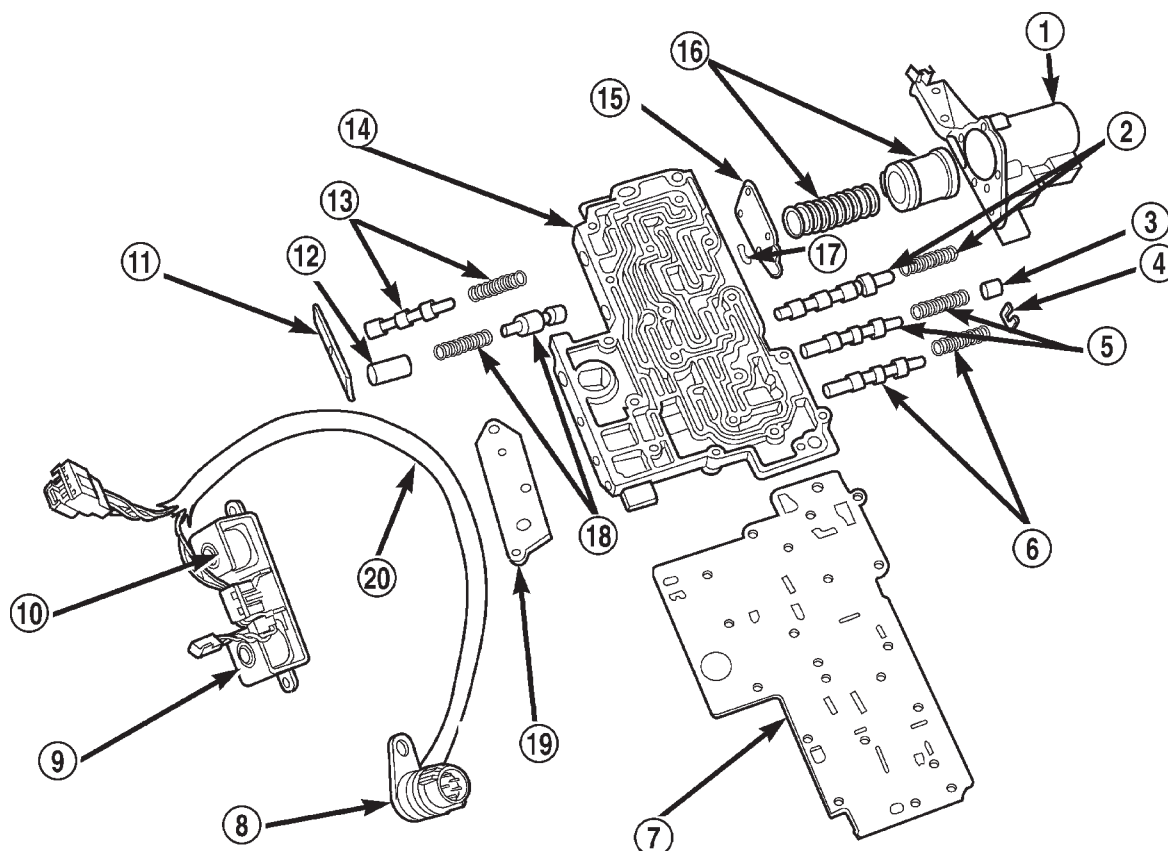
Upper Housing Shift Valve And Pressure Plug Locations
